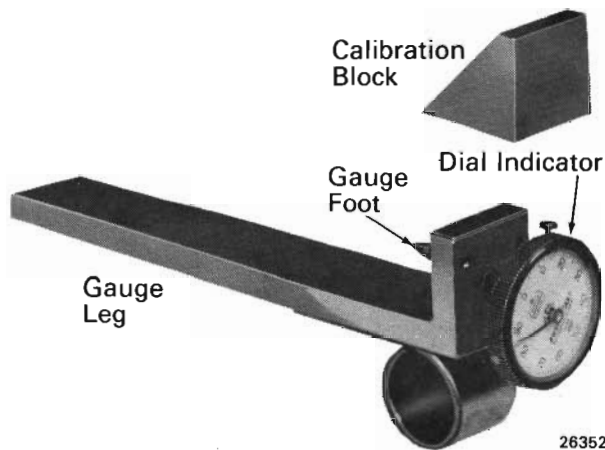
Head Retainer Wear Step Gauge, Shown With Dial Indicator (Not Included)
